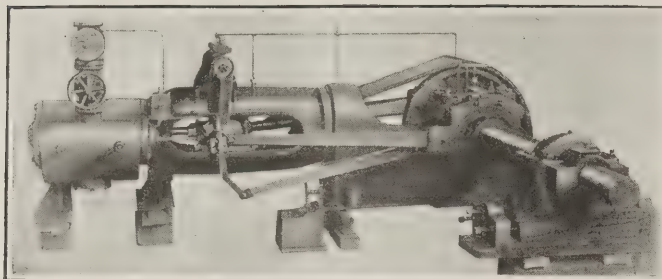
AUXILIARY FAN ENGINE PRIOR TO MOUNTING
